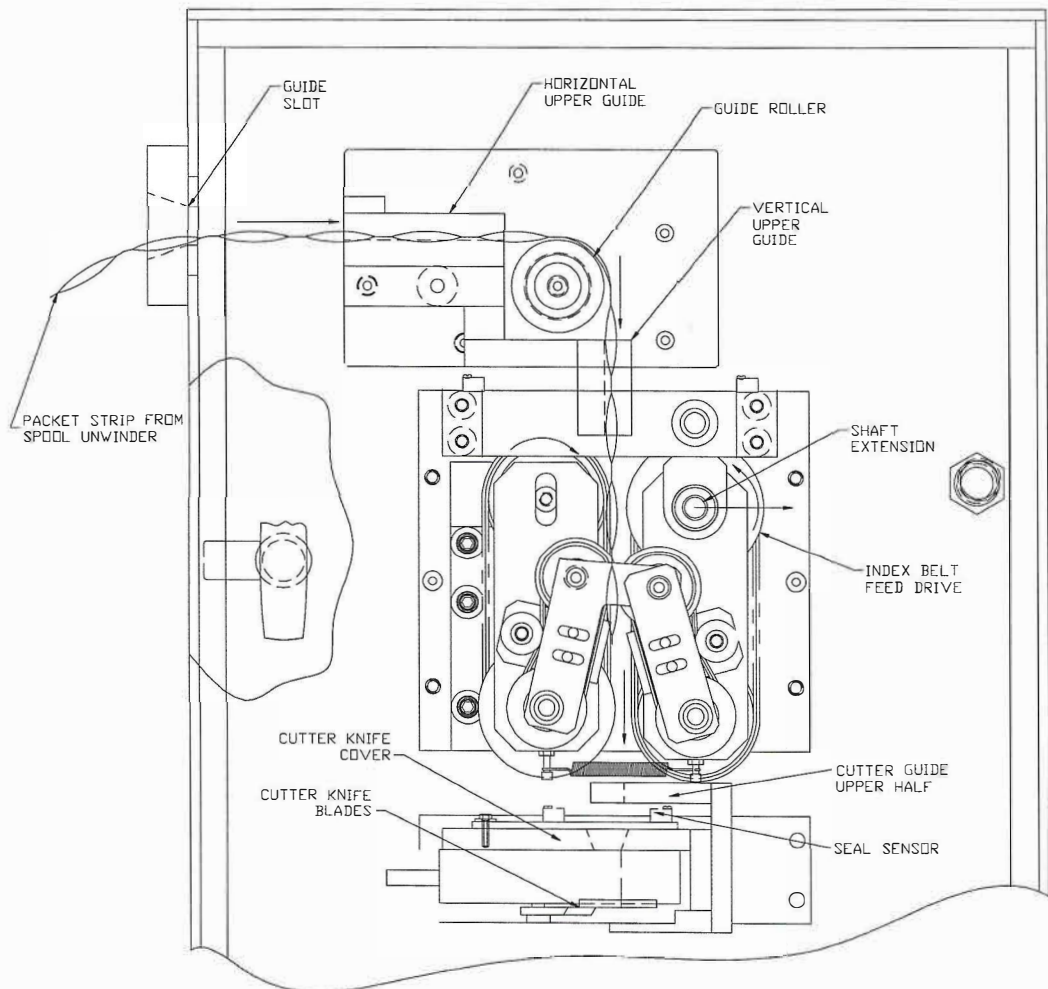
(Threading the packet strip into the belt feed assembly)
